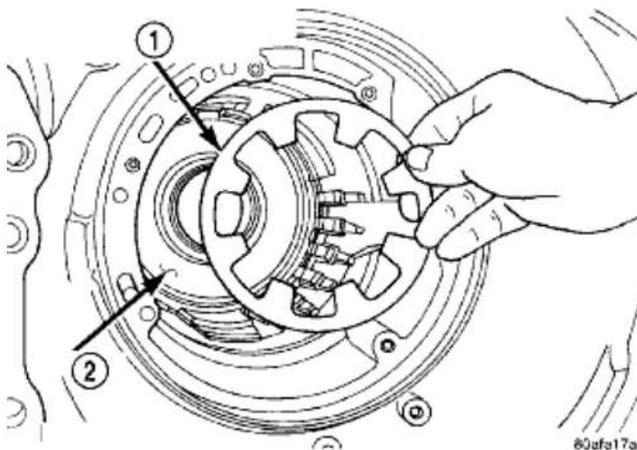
Removing/Installing Low/Reverse Piston Return Spring
